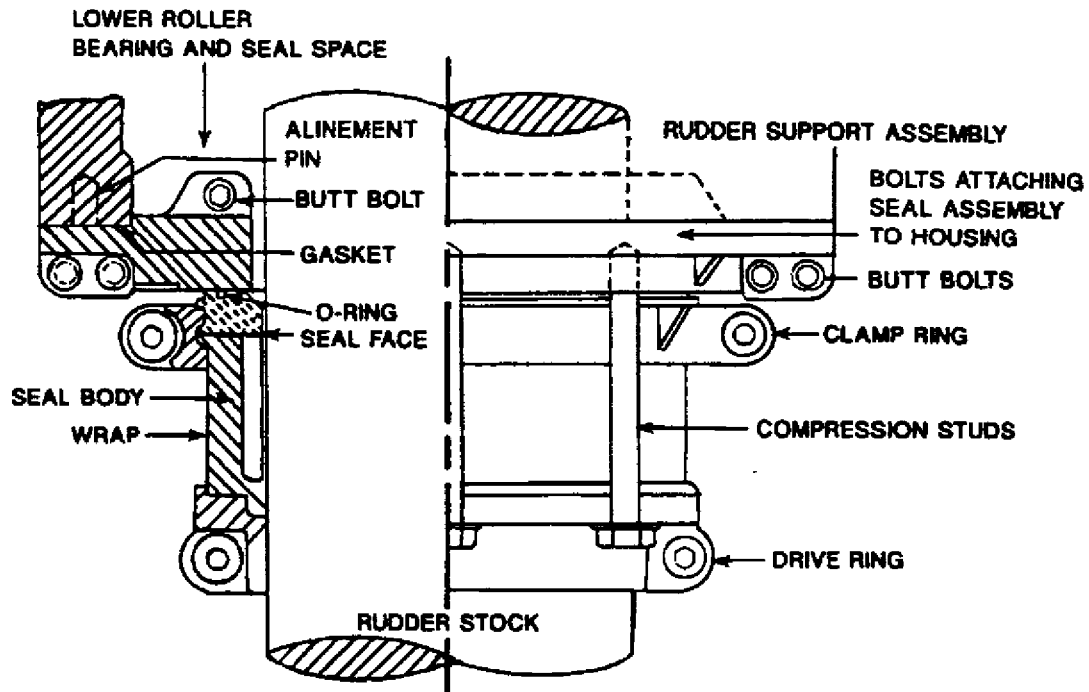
Mechanical Face-Type Seal for Rudder Stock Bearings
